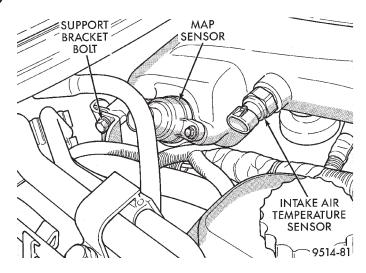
Intake Manifold Sensors and Left Plenum Support Bolt
